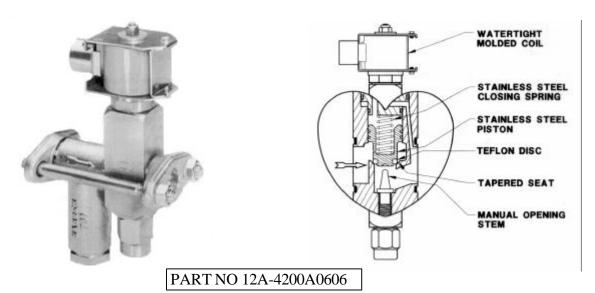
B Liquid Feed Solenoid Valve ("A" Valve)
